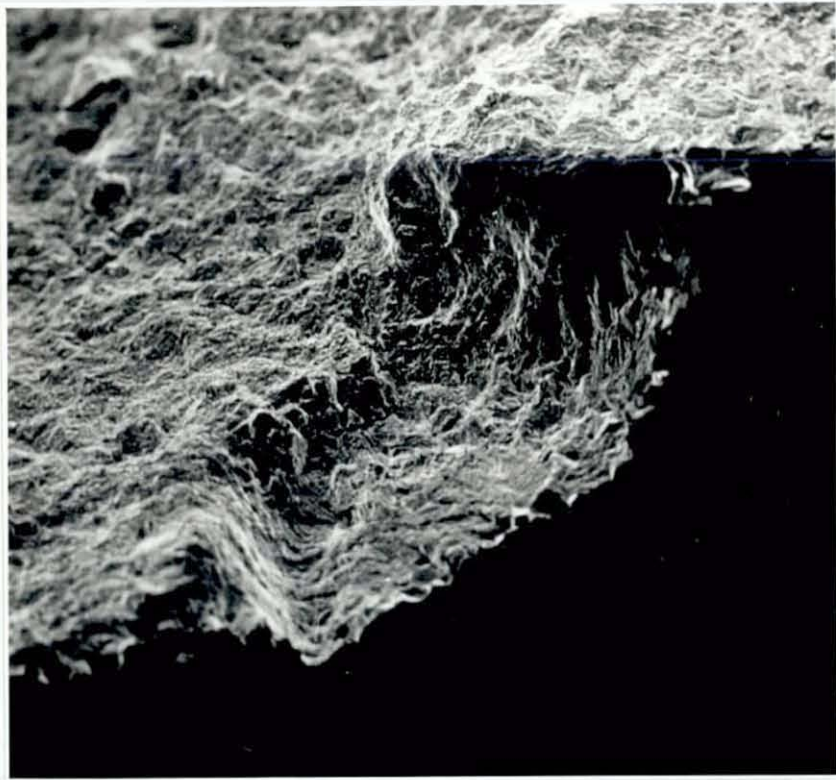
Fracture initiation from an existing dent at the weld (magnification factor 130).
